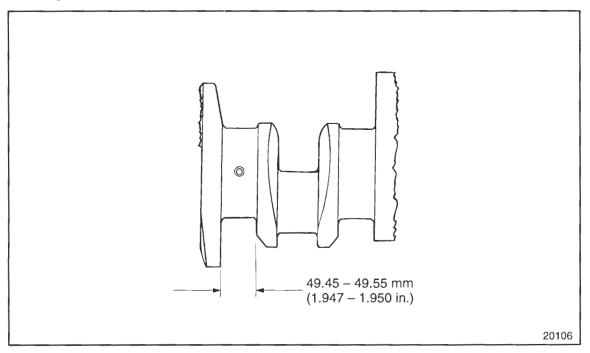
Standard Dimensions at No. 4 Main Bearing Thrust Washers
